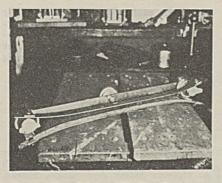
Shop View of Trolley Contactor Fully Assembled.
